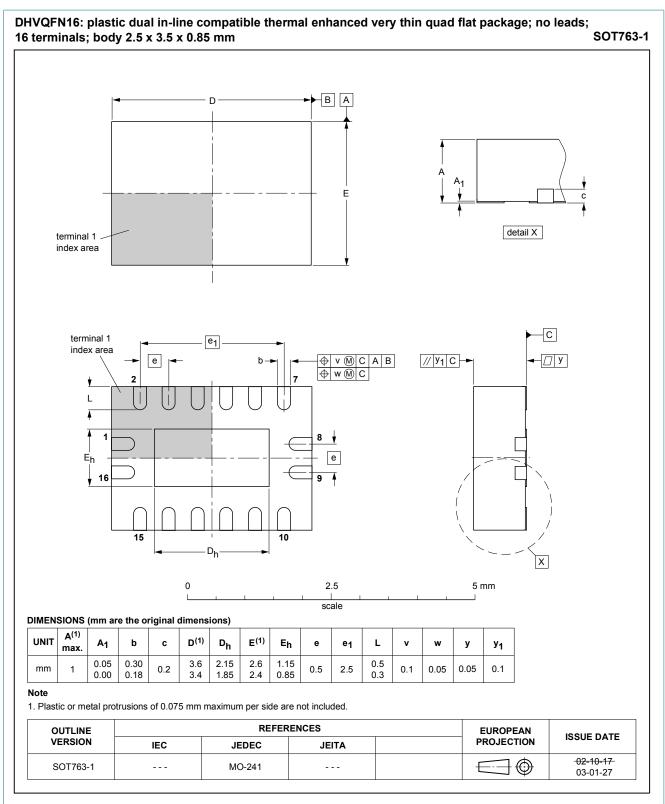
Package outline SOT763-1 (DHVQFN16)
